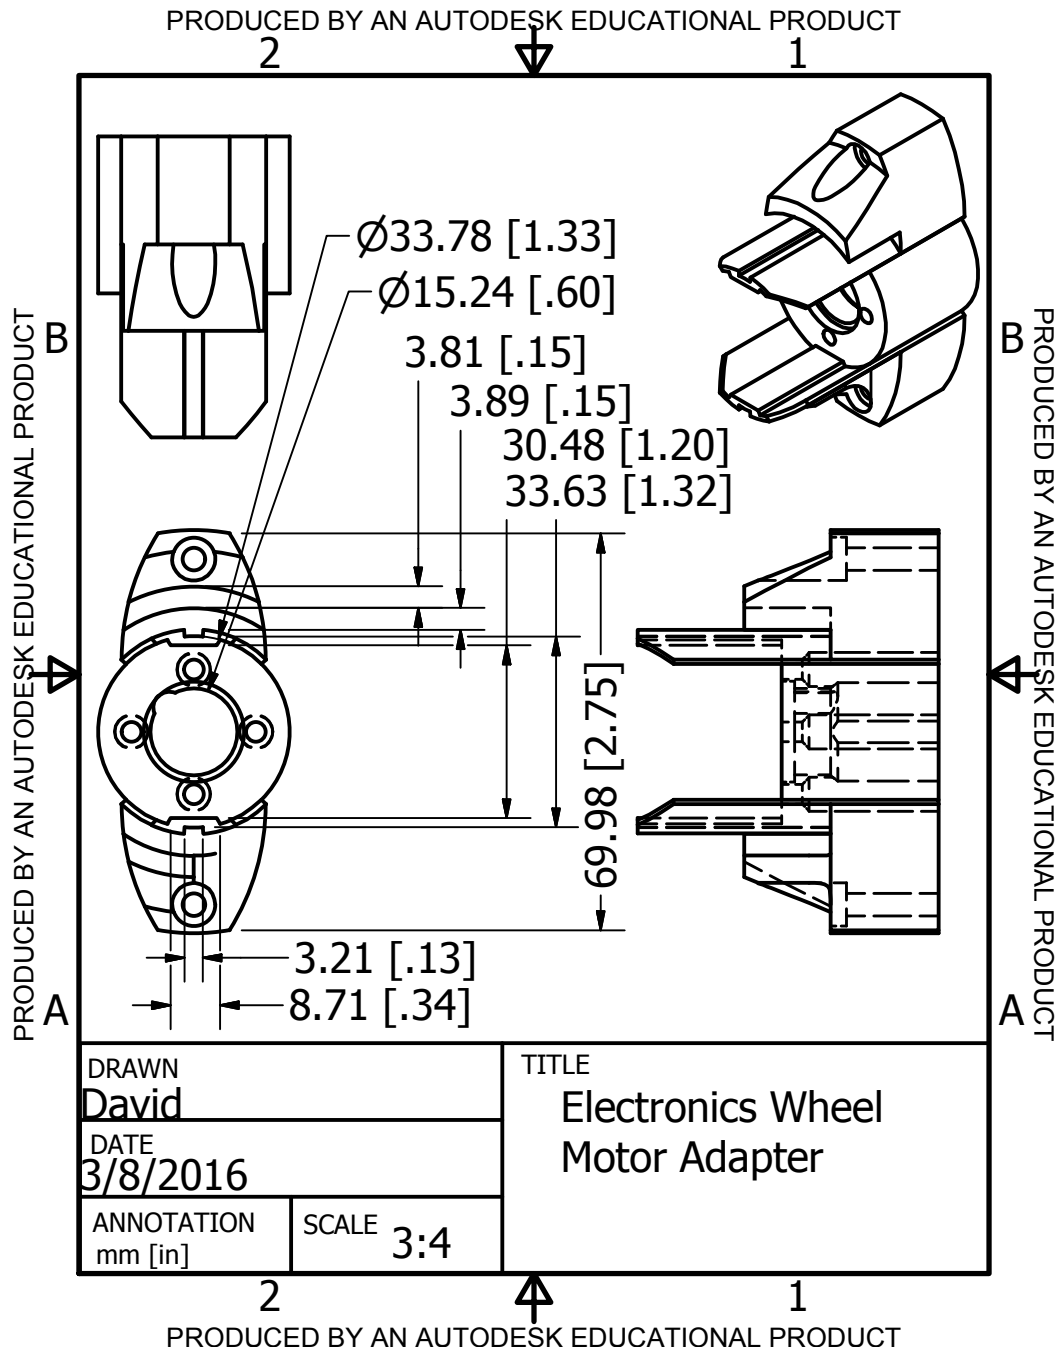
Mechanical drawing for the electronics wheel motor adapter. This piece is screwed into the motor with four M3 screws and screws into the electronics wheel with two 0.75" 6-32 screws. The grooves in this piece ensure the window blind assembly also rotates while providing clearance for the ribbon cable that connects this PCB to the internal electronics. Steel strapping is needed to secure this piece to the motor.
